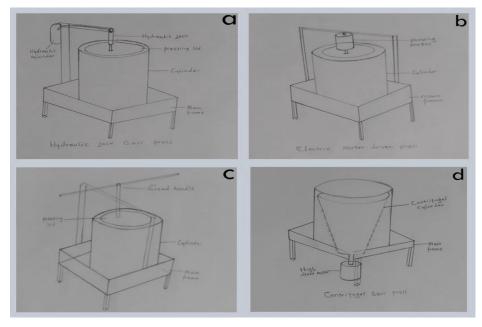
(a, b, c, d) show the four sketches of the design solution ideas for the identified problem (hydraulic jack gari press, electric motor driven press, torsional compression thread based Gari Screw-type Press, centrifugal press)
